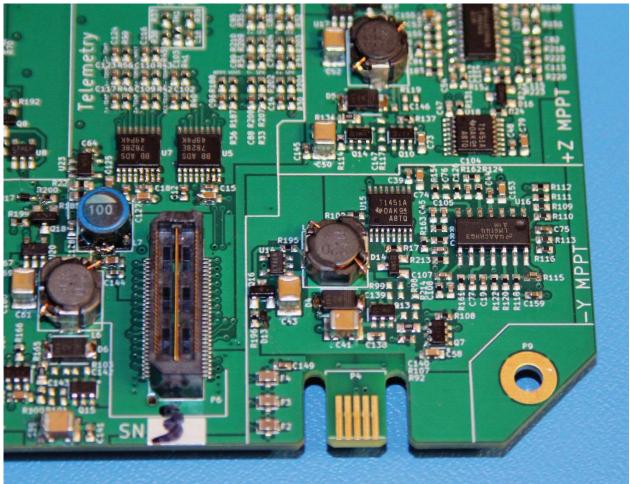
Samtec QTH-030-02-L-D-A board to board connector shown on left side of image, Samtec MEC1-105-02-L-D-NP-A edge connector shown near middle of image with male portion of connector made of PCB material
